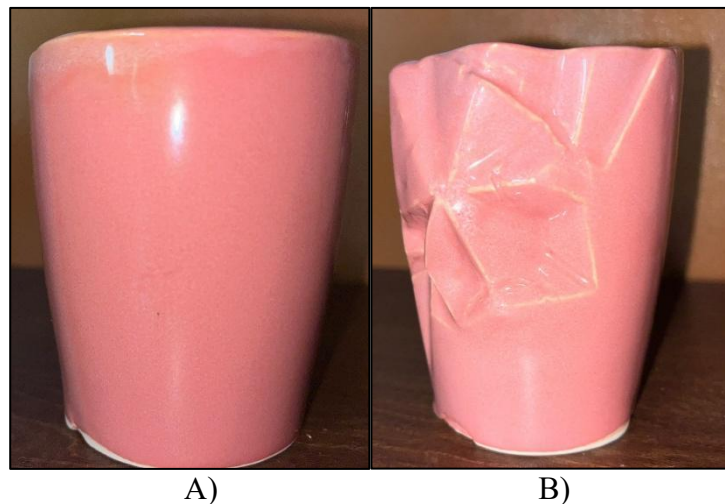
Geometry Cup Casting Use RPOP + Silubit G80 Mould After Glazing
